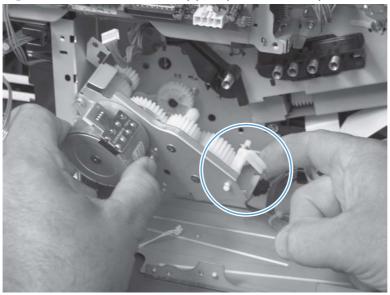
Remove the tray-pickup drive assembly (9 of 10)
